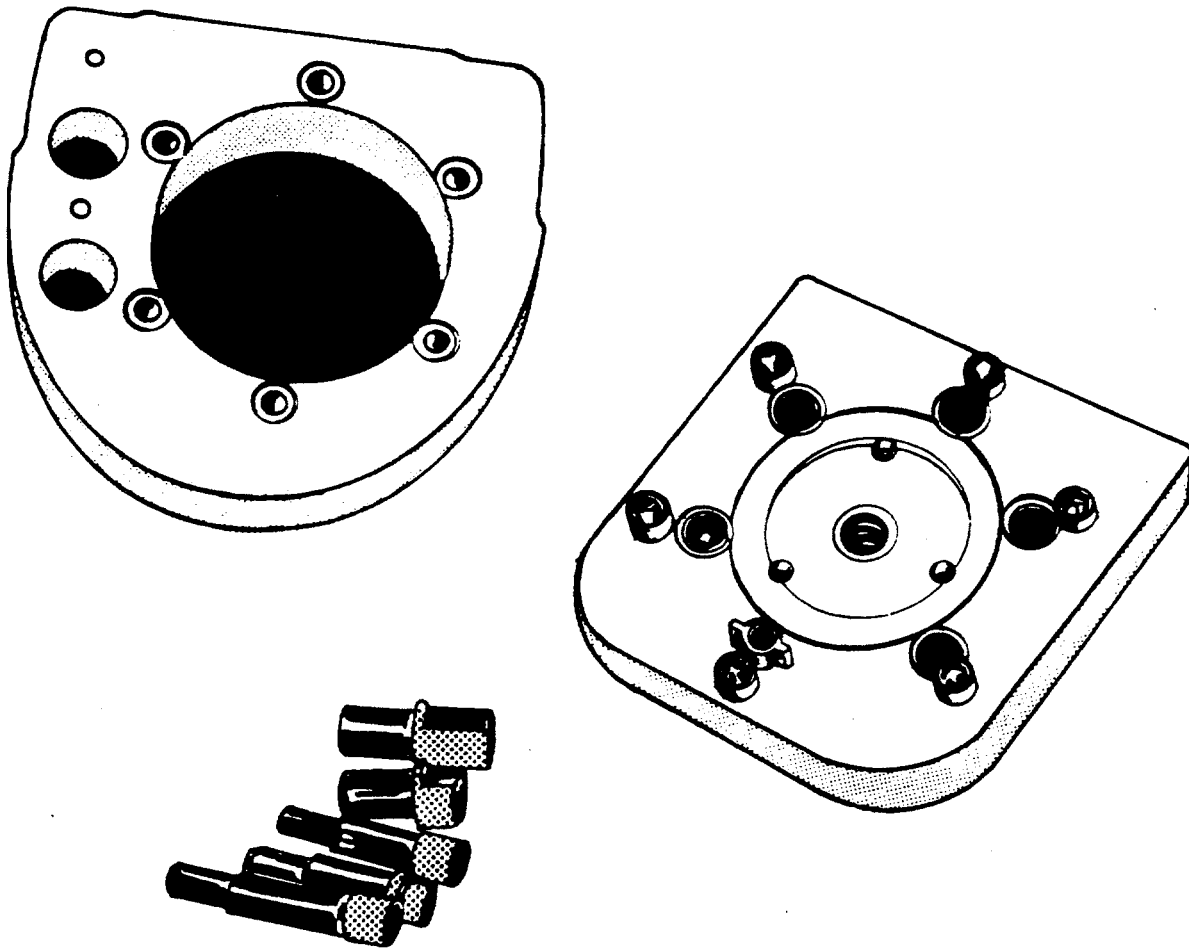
REAMING FIXTURE (90° GEARBOX MOUNT)
